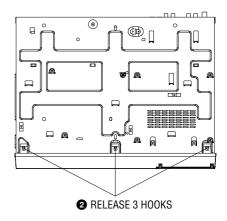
Ass'y Front Panel Removal (Bottom View)
